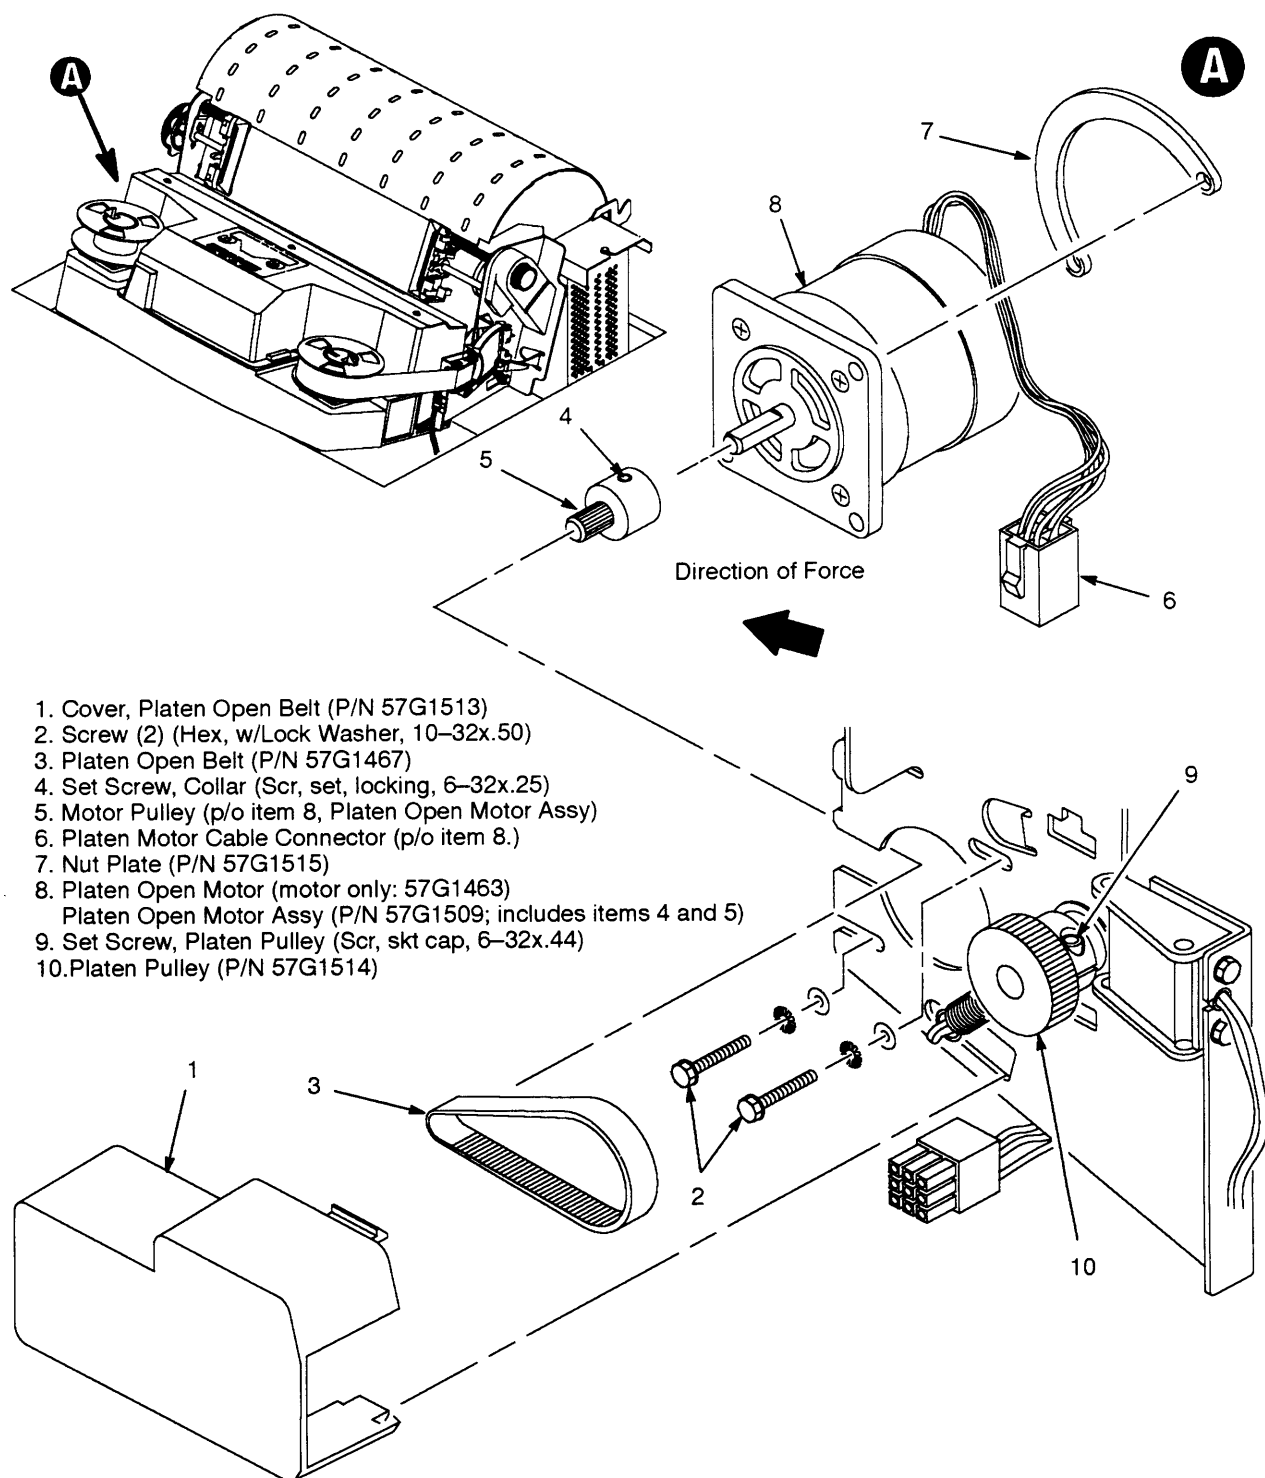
Motor Assembly, Platen Open, Removal
